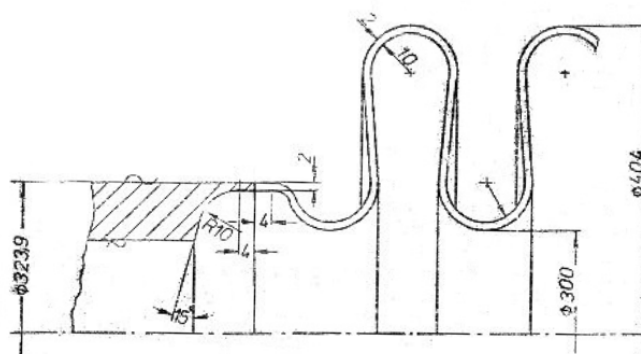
Original expansion joint. Convolution geometry detail (dimensions in mm)
